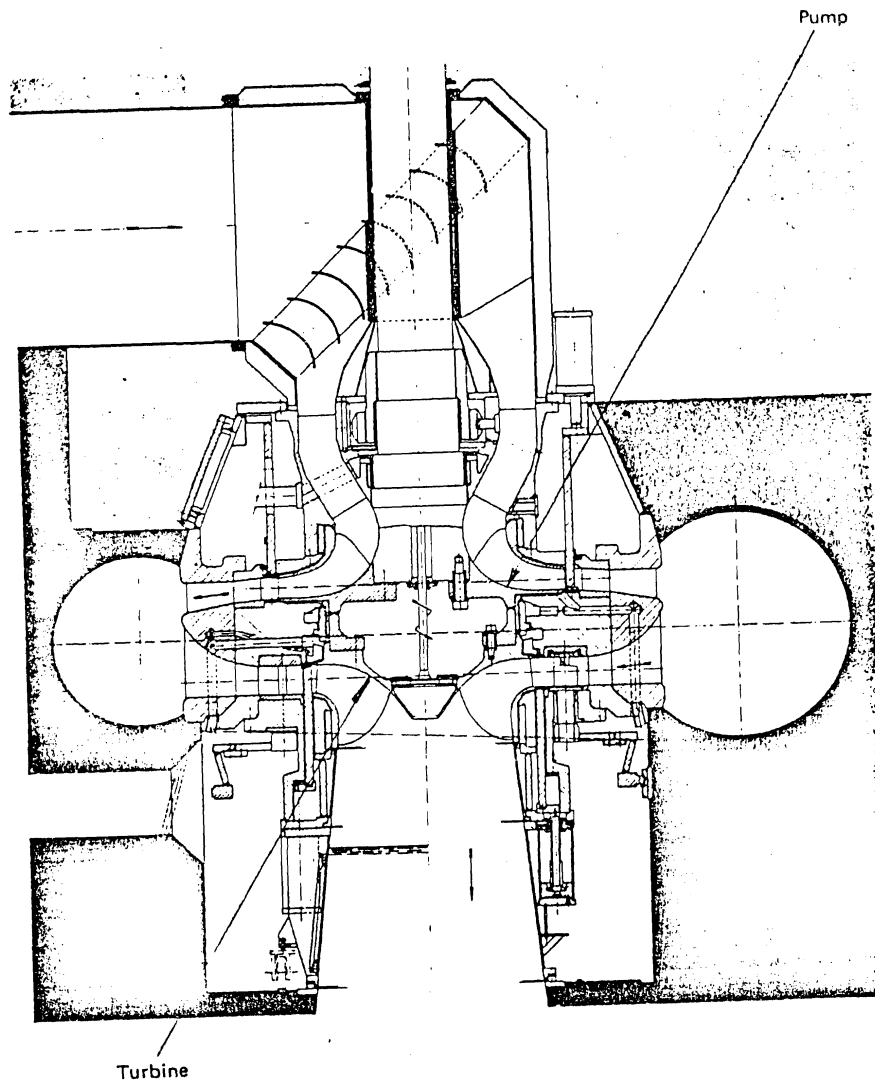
Sectional drawing of Isogyre pump/turbine. SOURCE: Vevey-Charmilles.
